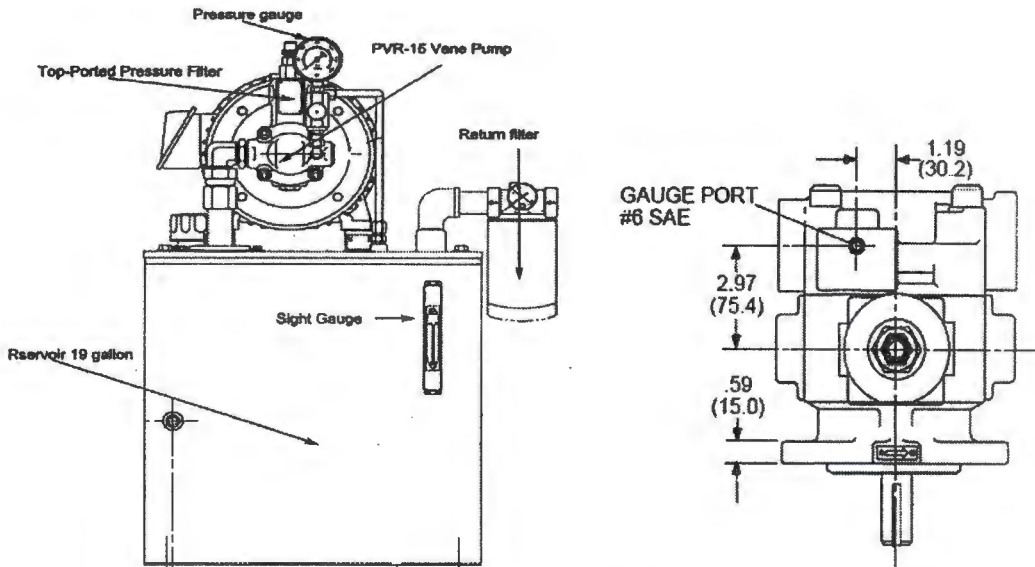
PVR-15 vane pump and its dimensions (15B 15-RF-0-5-E, actual 400 -1500 Psi - keyed shaft standard) used in the hydraulic system
